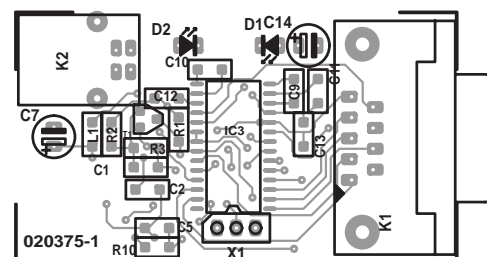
Copper track layout and component overlay of the PCB designed for the interface.
